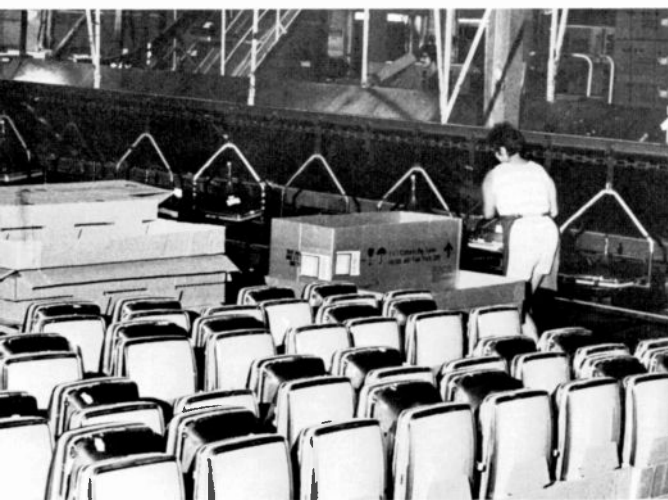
(left) Picture-tube unloading area. The operator is placing a 25-inch tube onto the color-coded monorail conveyor that takes it to the appropriate assembly line.
